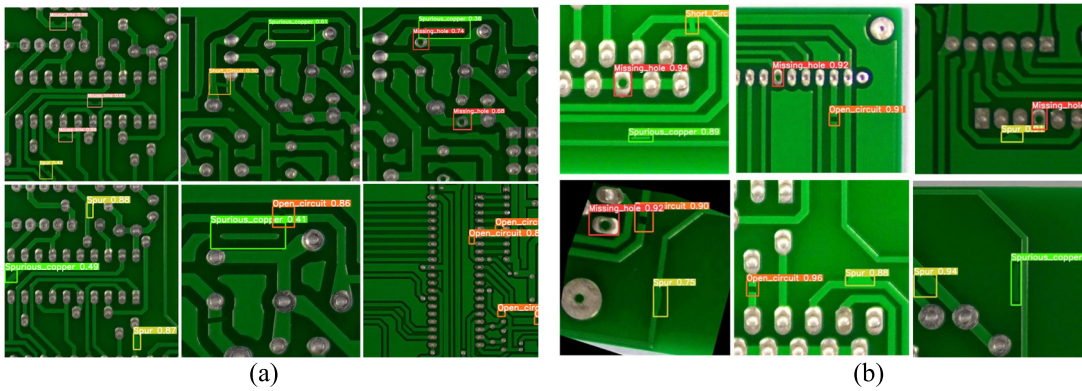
Illustration of PCB defect detection in (a) TDD\_PCB and (b) MDD\_PCB using YOLOv5.
